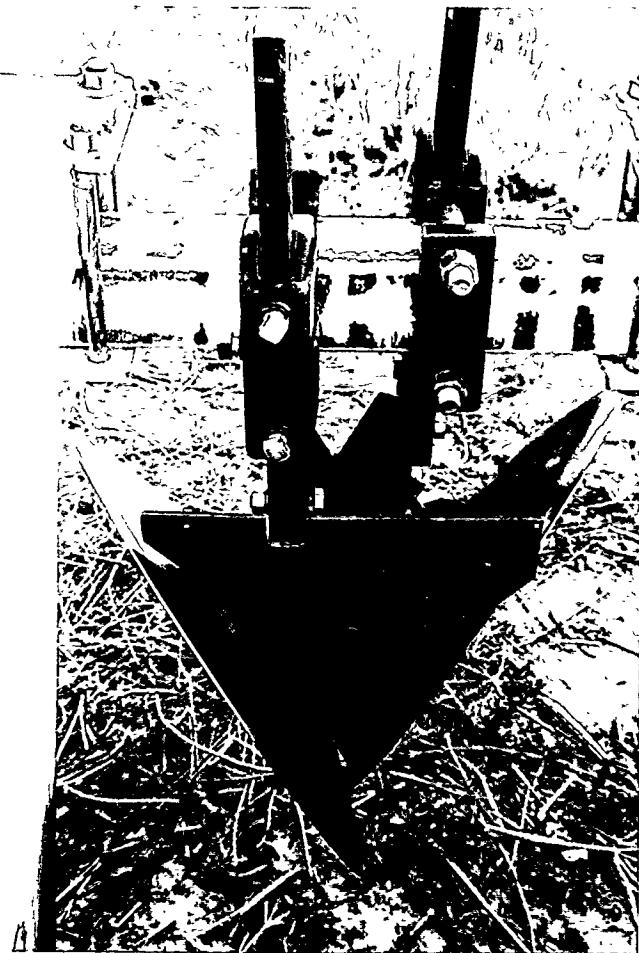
Mounting of the debris shield. Carriage bolts in slotted holes make this shield adjustable.
